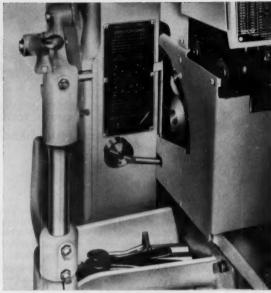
Arrangement of the drive-shaft gearing of Brown & Sharpe automatic shown in Fig. 1
